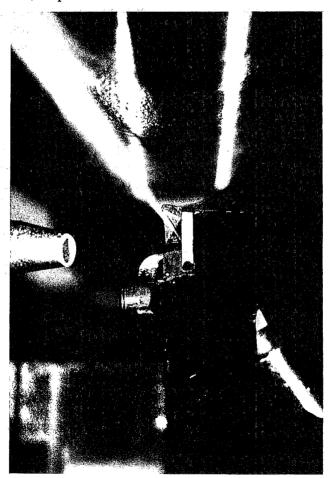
Photograph of the water stream exiting the carbide cutting tool rakeface
